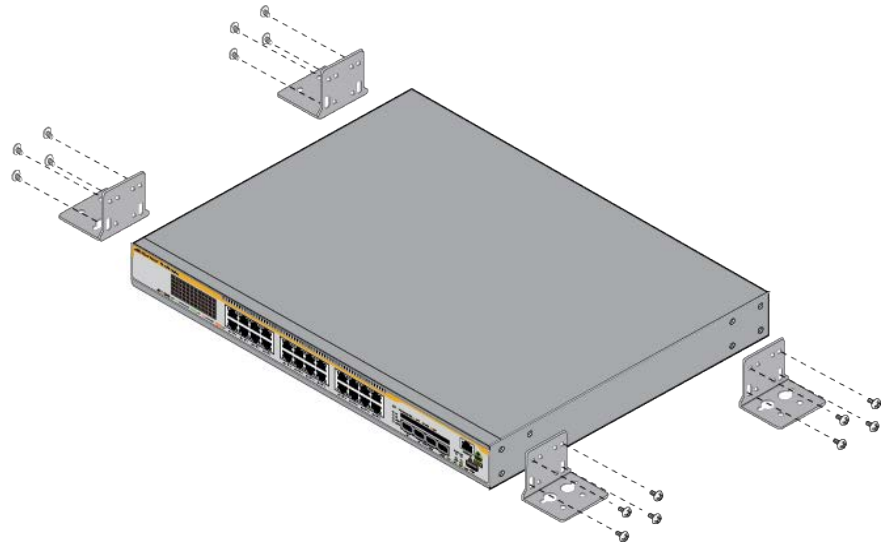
Installing the BRKT-J24 Brackets to the x250-28XTm Switch
